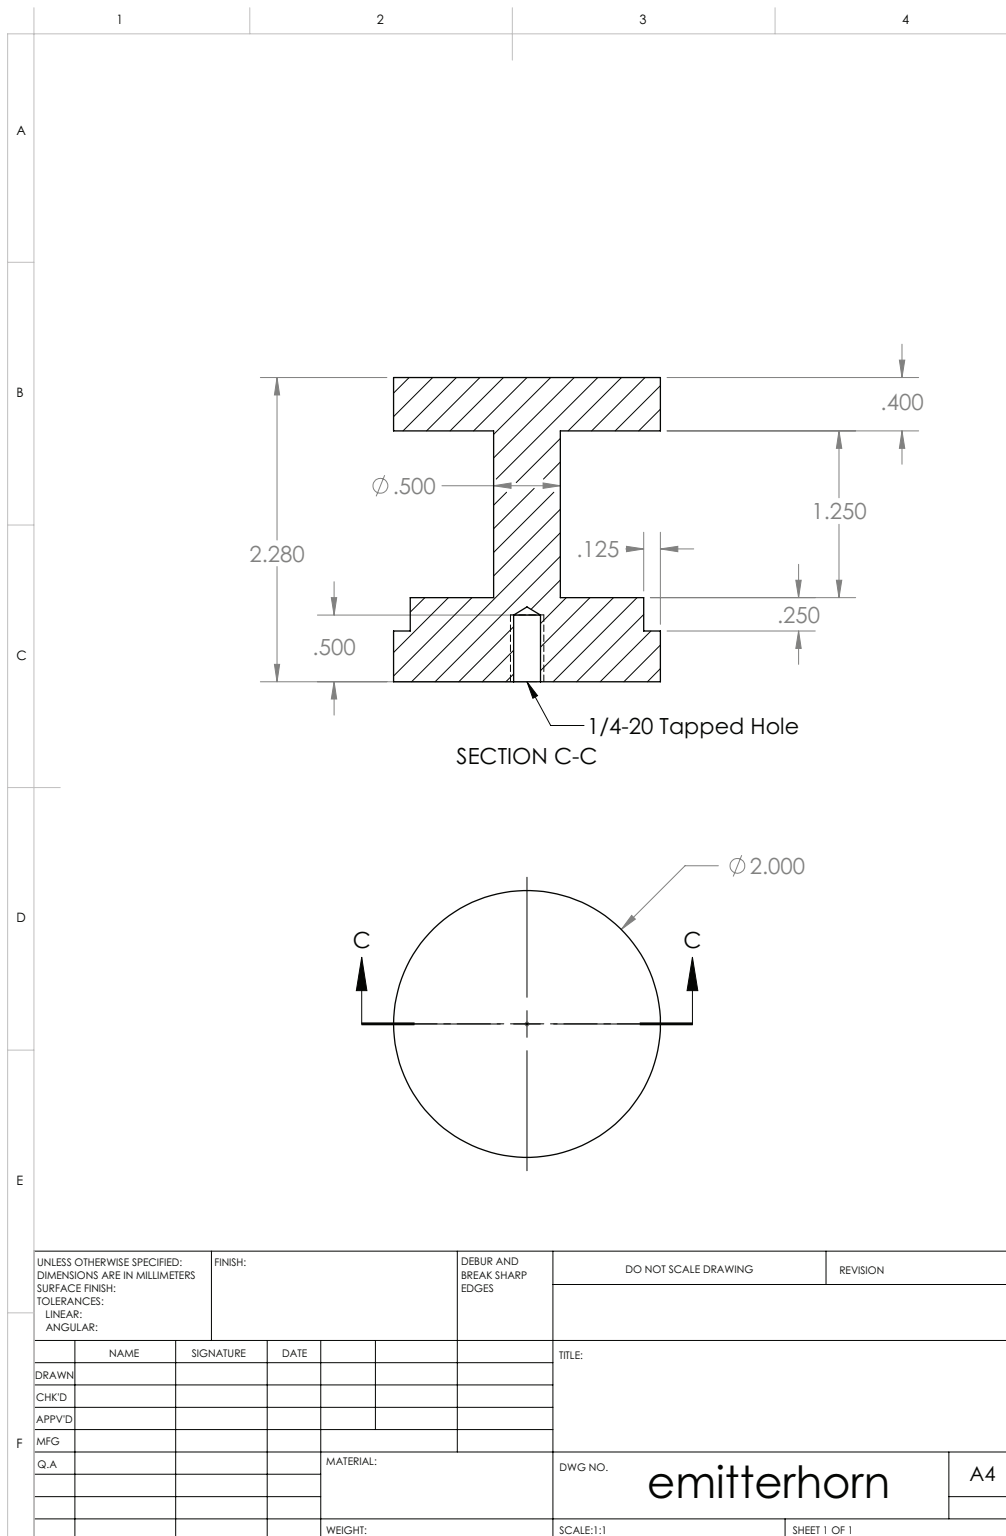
Machine drawing of the aluminum emitter horn used in the transducer.
